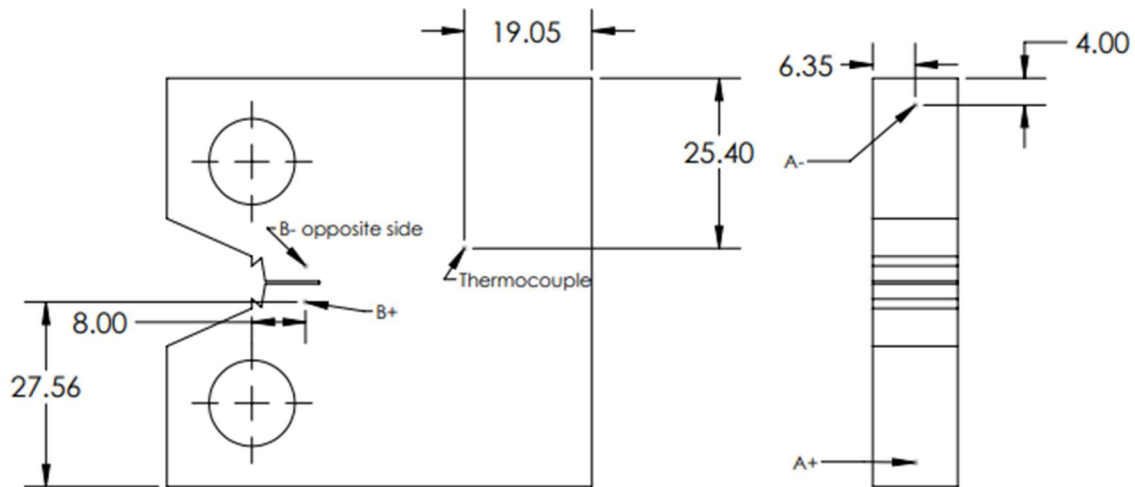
Spot weld locations for DCPD, power supply and thermocouple (in mm).
